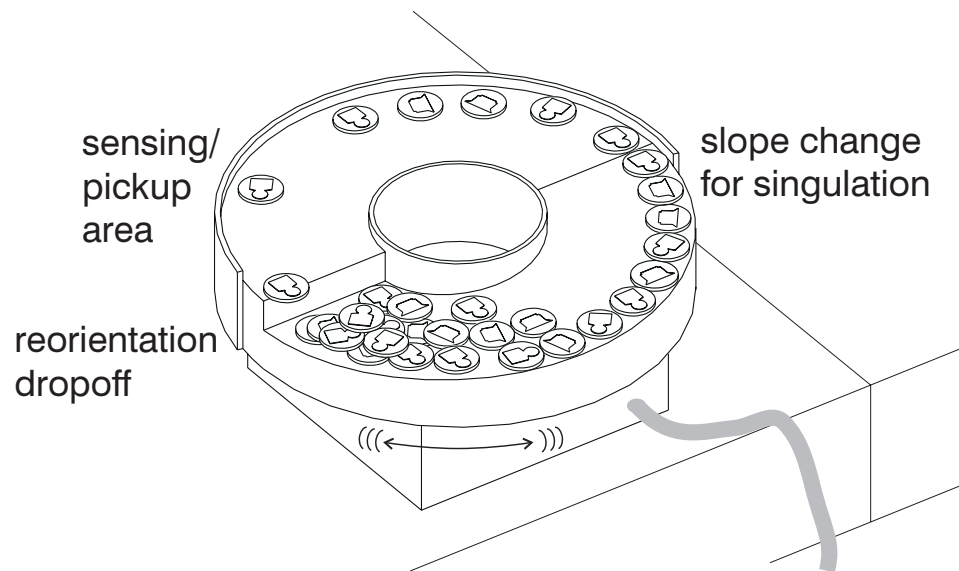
A miniature mobile parts feeder, consisting of a partially sloped annular feed tray (outside edge partially omitted for illustrative purposes) mounted on a planar robot.
